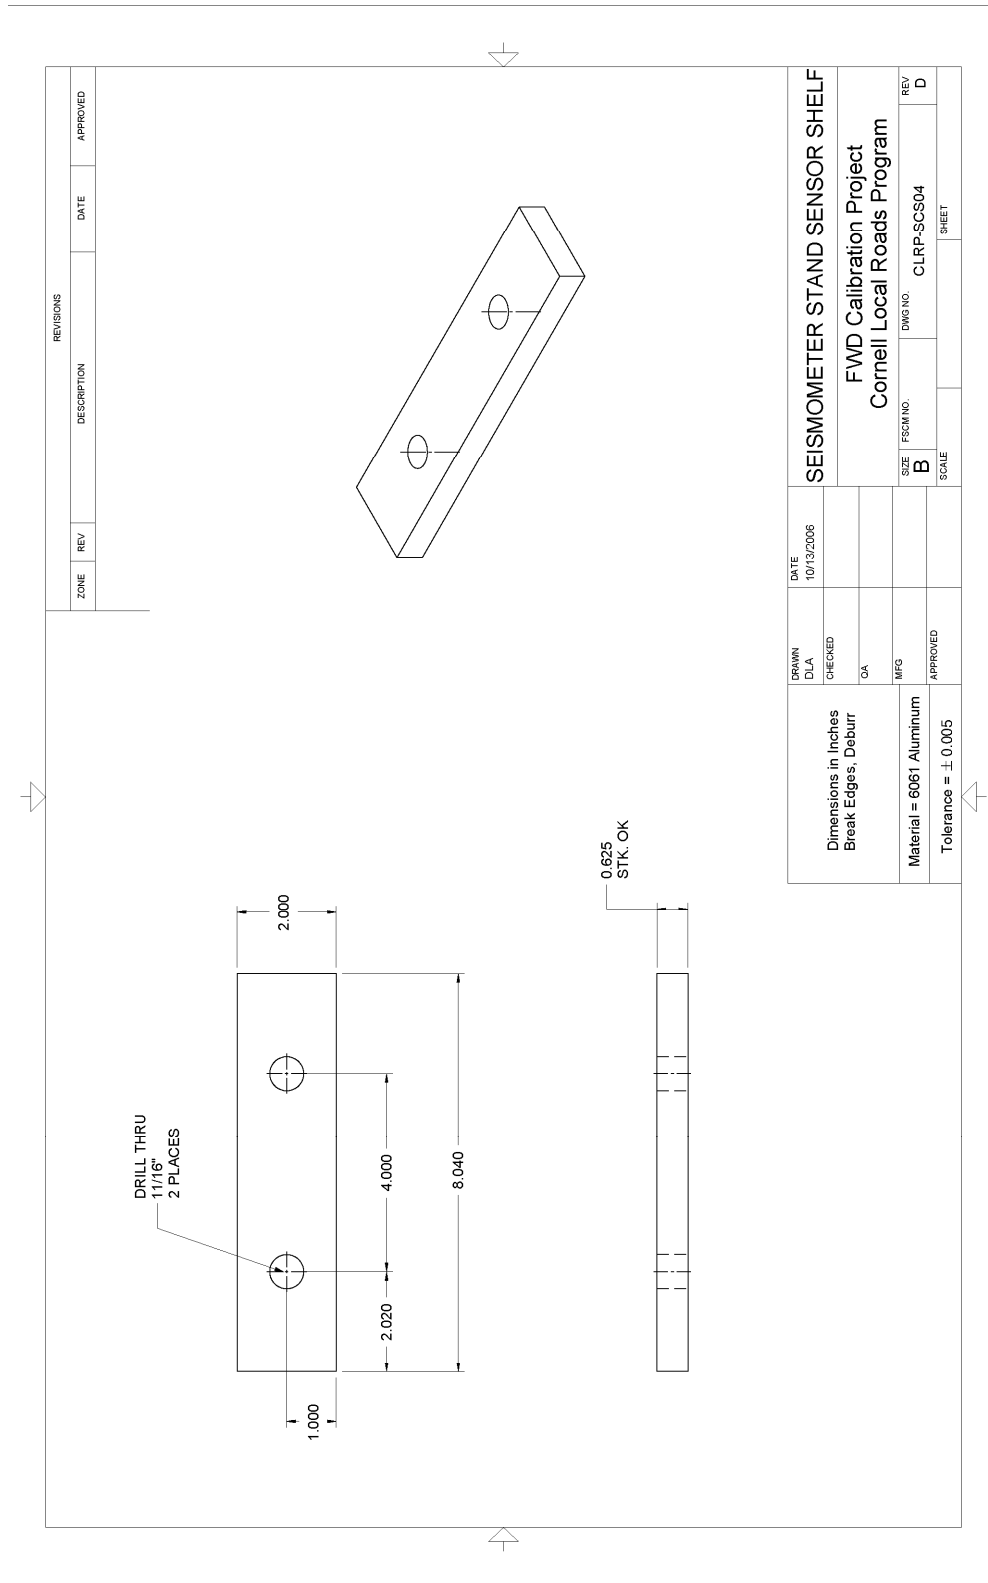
Drawing. CLRP-SCS04 Seismometer Stand Sensor Shelf.
